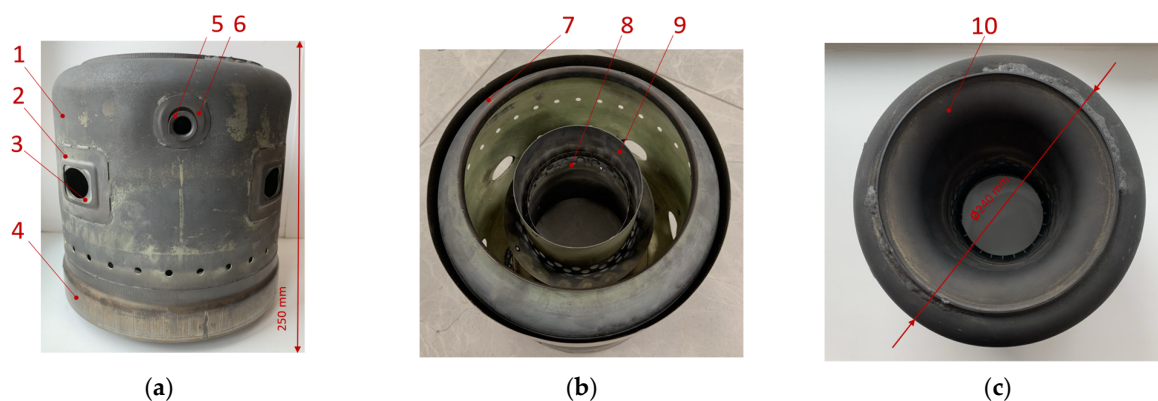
Components of the combustion chamber housing of the Capstone micro-GTU C 65: (a) main view, (b) view of the combustion chamber body from below, (c) view of the combustion chamber body from below. 1—shell (body), 2—outer flange, 3—adapter plate, 4—shell lower, 5—adapter plate, 6—external flange, 7—bottom, 8—lower funnel, 9—lower branch pipe, 10—funnel.
